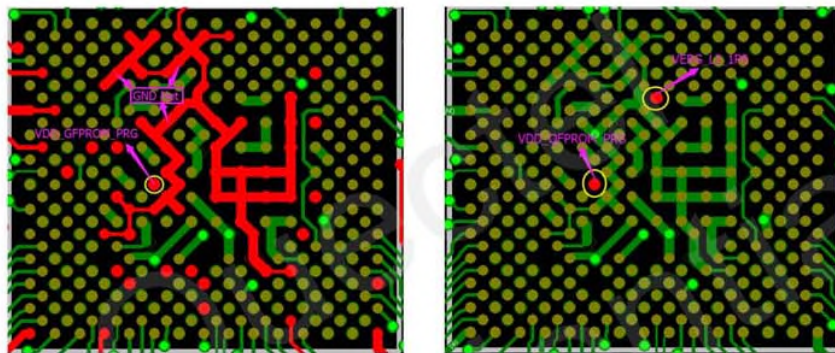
PCB Designs of BG96 R1.1 and R1.2
